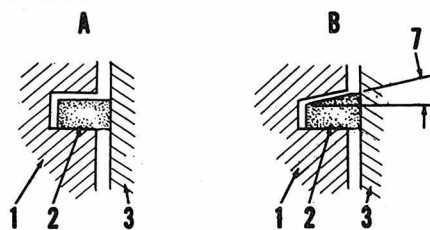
Keystone type piston and ring (B) is used on later models.
